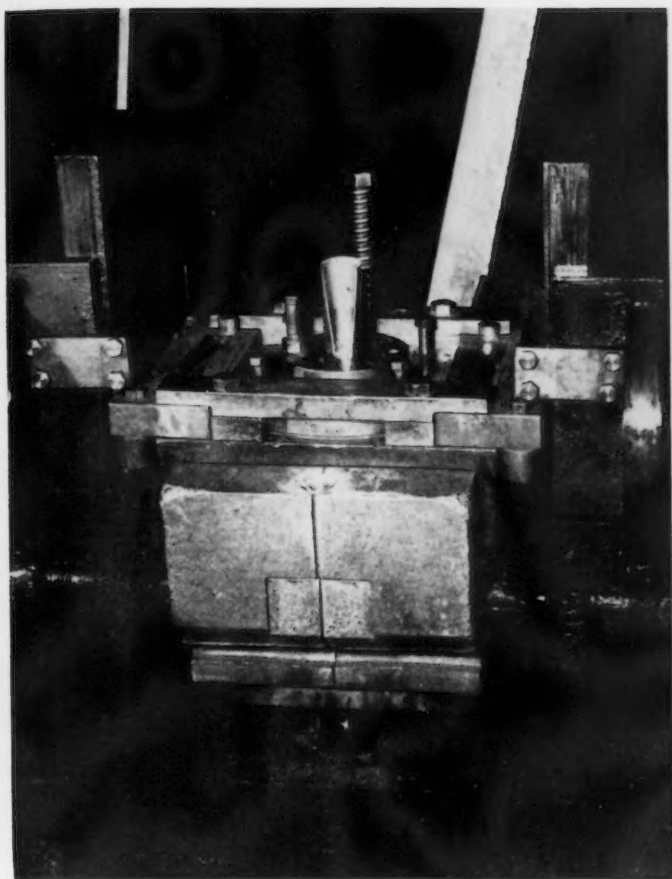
When casting inserts, the insert is dropped through the clearance hole and centered by the thin sheet metal sleeve shown projecting from the upper die.
